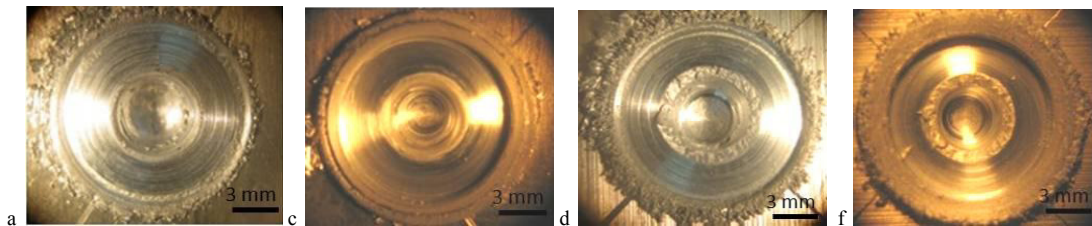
Welds surface appearance. (a) 5-6-05; (c) 5-6-6; (d) 6-5-2; (f) 6-5-12.
